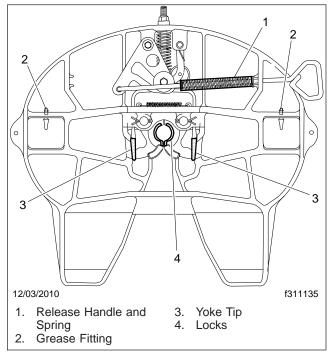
, Holland FW35 Fifth Wheel, Grease Lubrication
